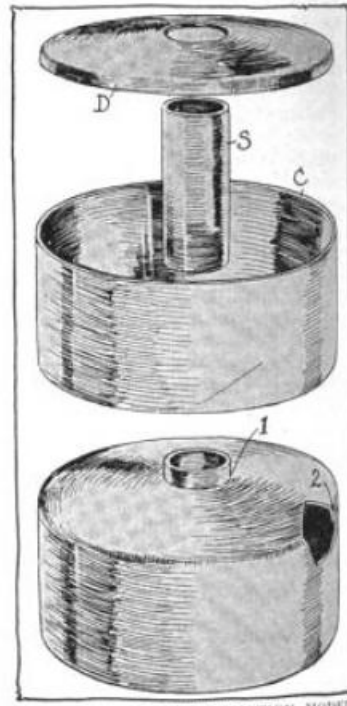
FLOAT CONSTRUCTION MODELS A AND C
